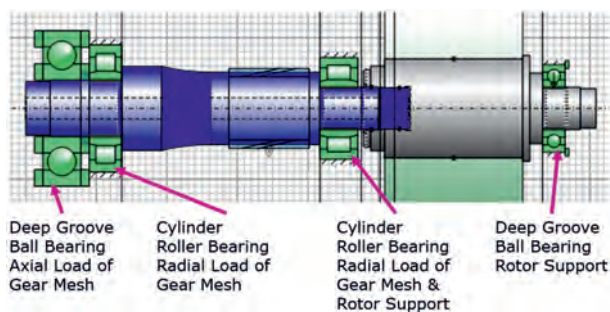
Bearing system for rotor shaft and transmission input shaft
